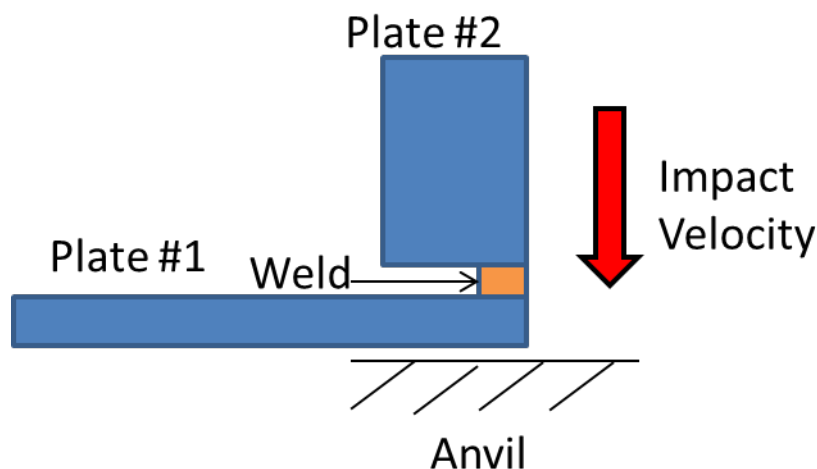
Proposed Weld Impact Test Sketch
